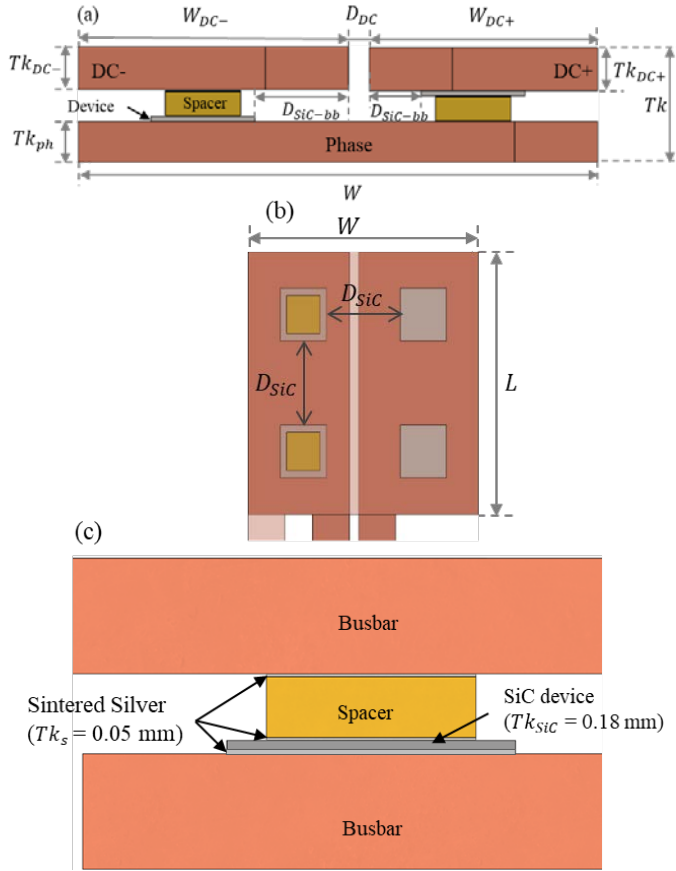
Schematic of the power module CAD model, showing the definition of geometric parameters in one phase: (a) sectional view, (b) top view, and (c) magnification of the package architecture.
